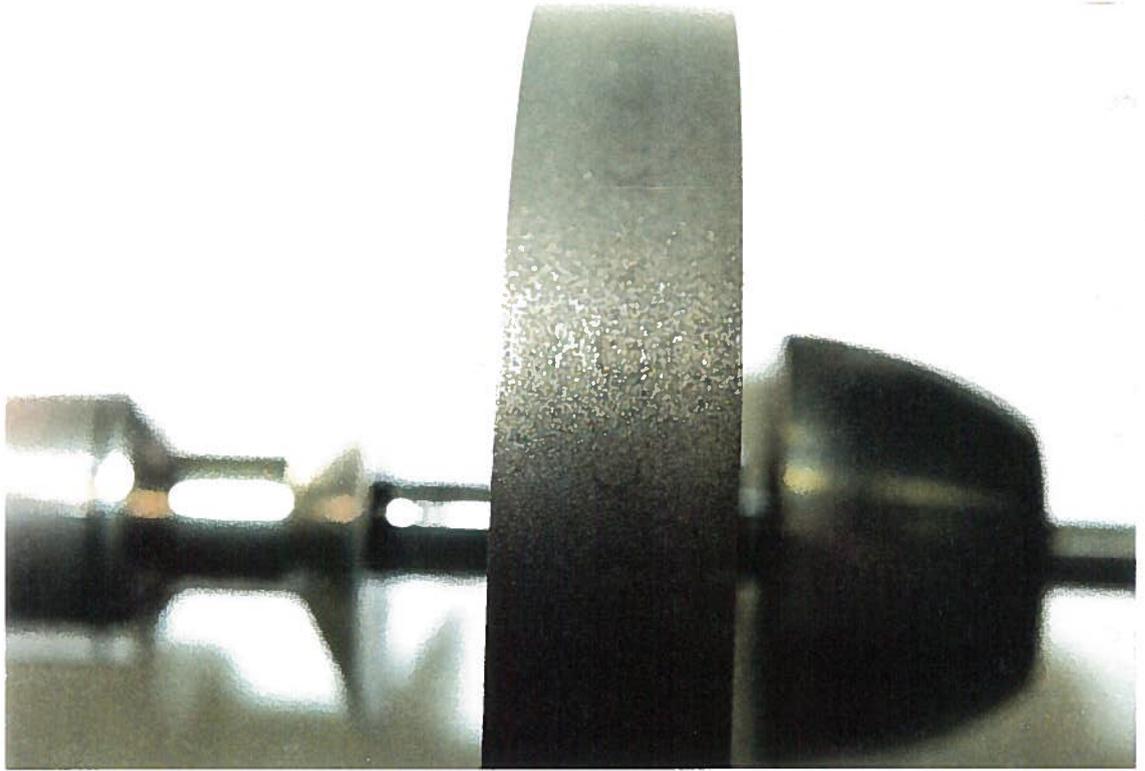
MANUFACTURER C. 100 mm DIAMETER METER, ROTOR RING WEAR
